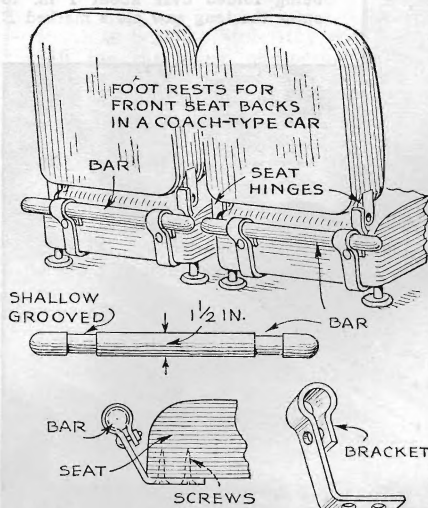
Strap iron brackets, fastened to front seats in a coach, hold crossbar for foot rest
